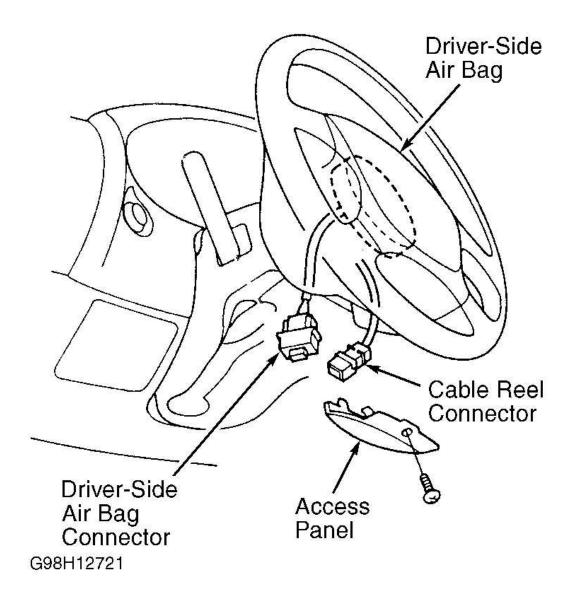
Locating Driver-Side SRS Maintenance Lid & Connector (Typical) Courtesy of AMERICAN HONDA MOTOR CO., INC.
